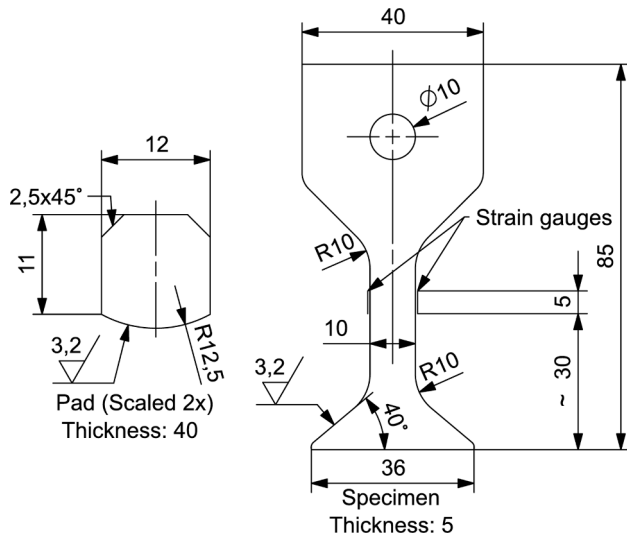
Geometric details of the specimen and contact pad used in this paper. General tolerances are in accordance with ISO 2768-m. Units are in millimetres.
